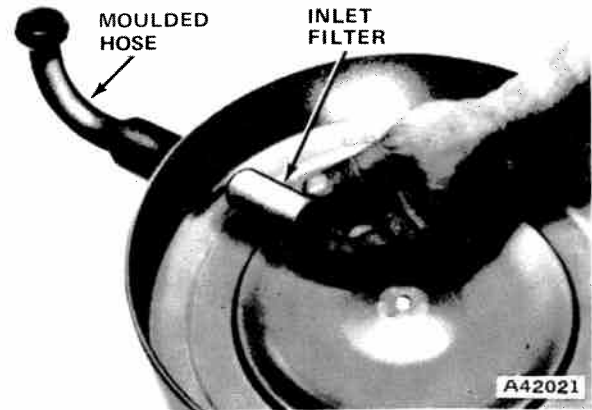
A-22 PCV Air Inlet Filter - Six-Cylinder
